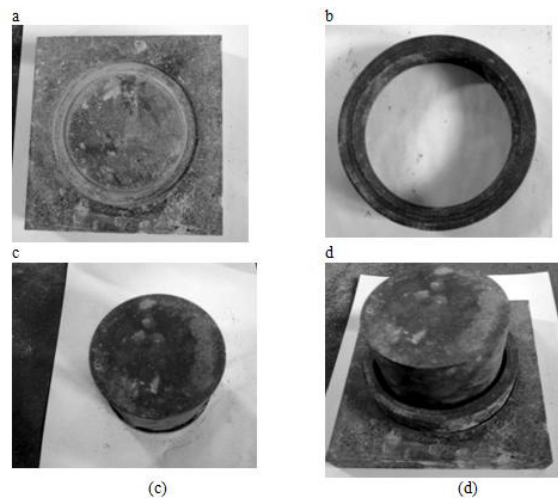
(a) Base part, (b) mould body , (c) ramming press , (d) mould assembly .
